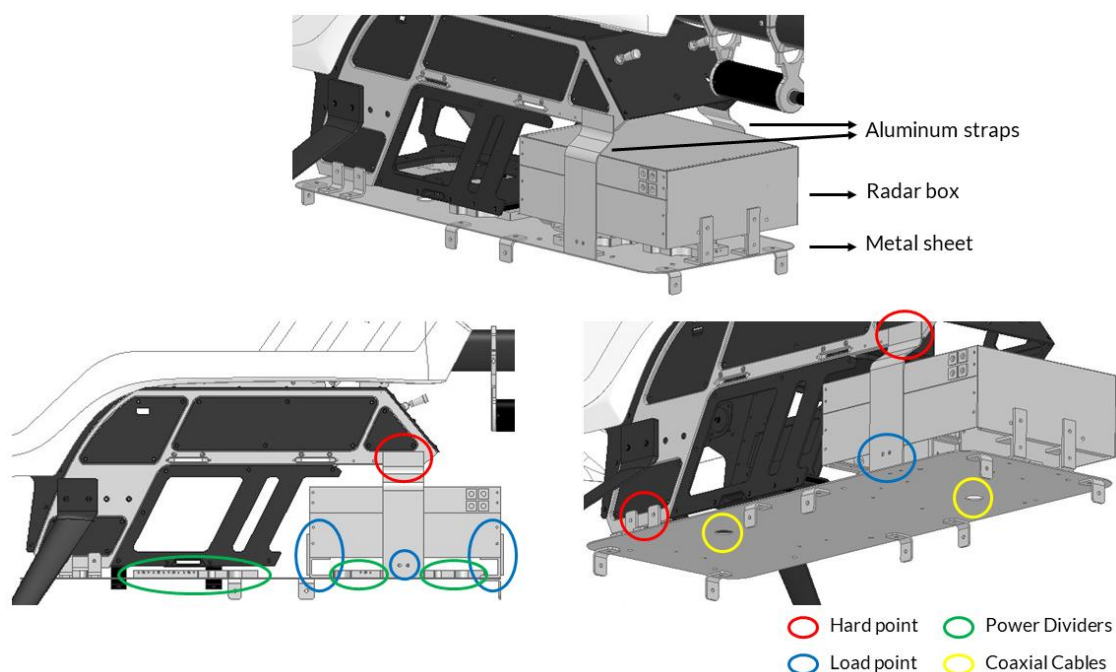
Isometric, side, and bottom views of the metal sheet, radar box, and aluminum straps integrated with the rotorcraft
